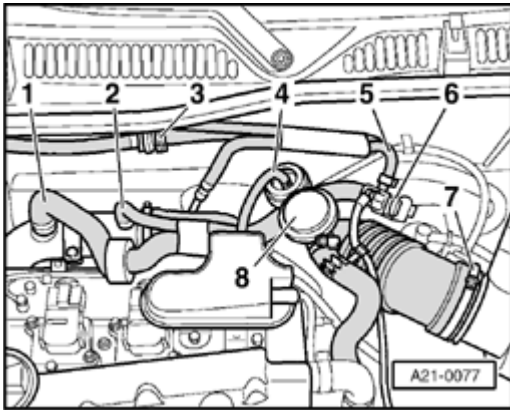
Air Intake From Connection On Turbocharger Hose Removal Components
